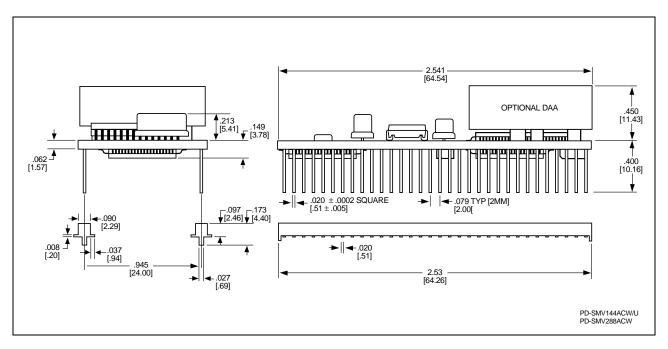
SocketModem Physical Dimensions - SMV144ACW/U
